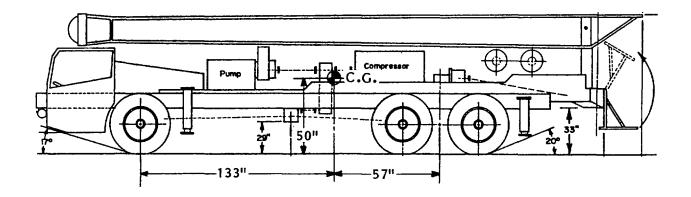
Drilling Rig Clearance Angles, Center of Gravity
